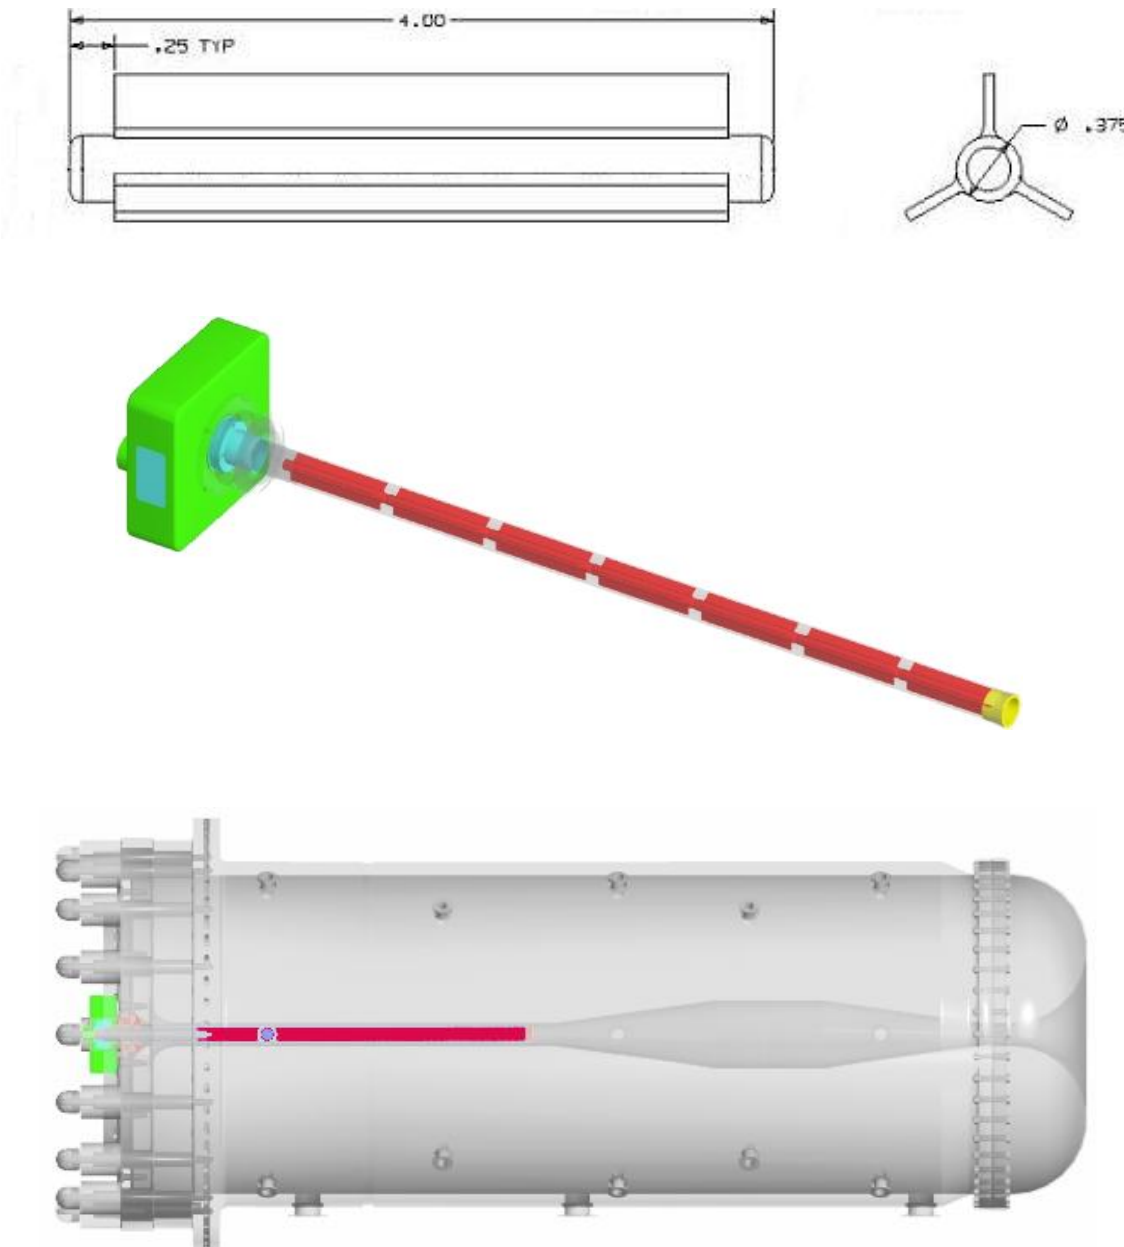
The Booster Neutrino Beamline beryllium target. The top images show the dimensions of the individual target sections (in inches). The middle drawing shows how the seven sections are assembled to make the full target [138], and the lower drawing shows how the target assembly is mounted inside the upstream half of the inner conductor [138].
